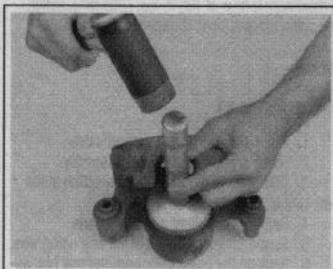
Use the proper size driving tool and a mallet to properly seal the boots in the caliper housing
